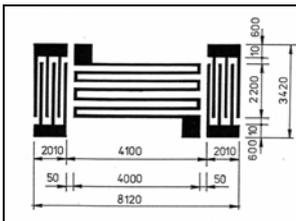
Delay line PLO 39 design drawing (all dimensions in μm)
